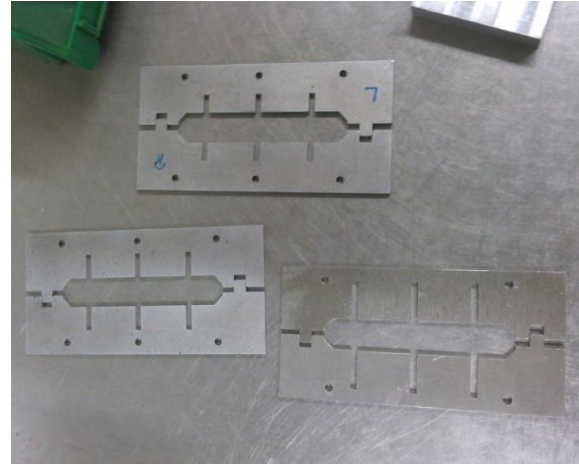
Cavity shape of the permanent shell mold to realize the wax specimen
